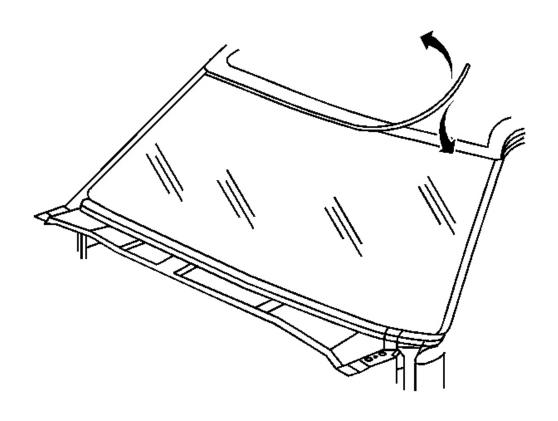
Identifying Reveal Molding Courtesy of GENERAL MOTORS CORP.
